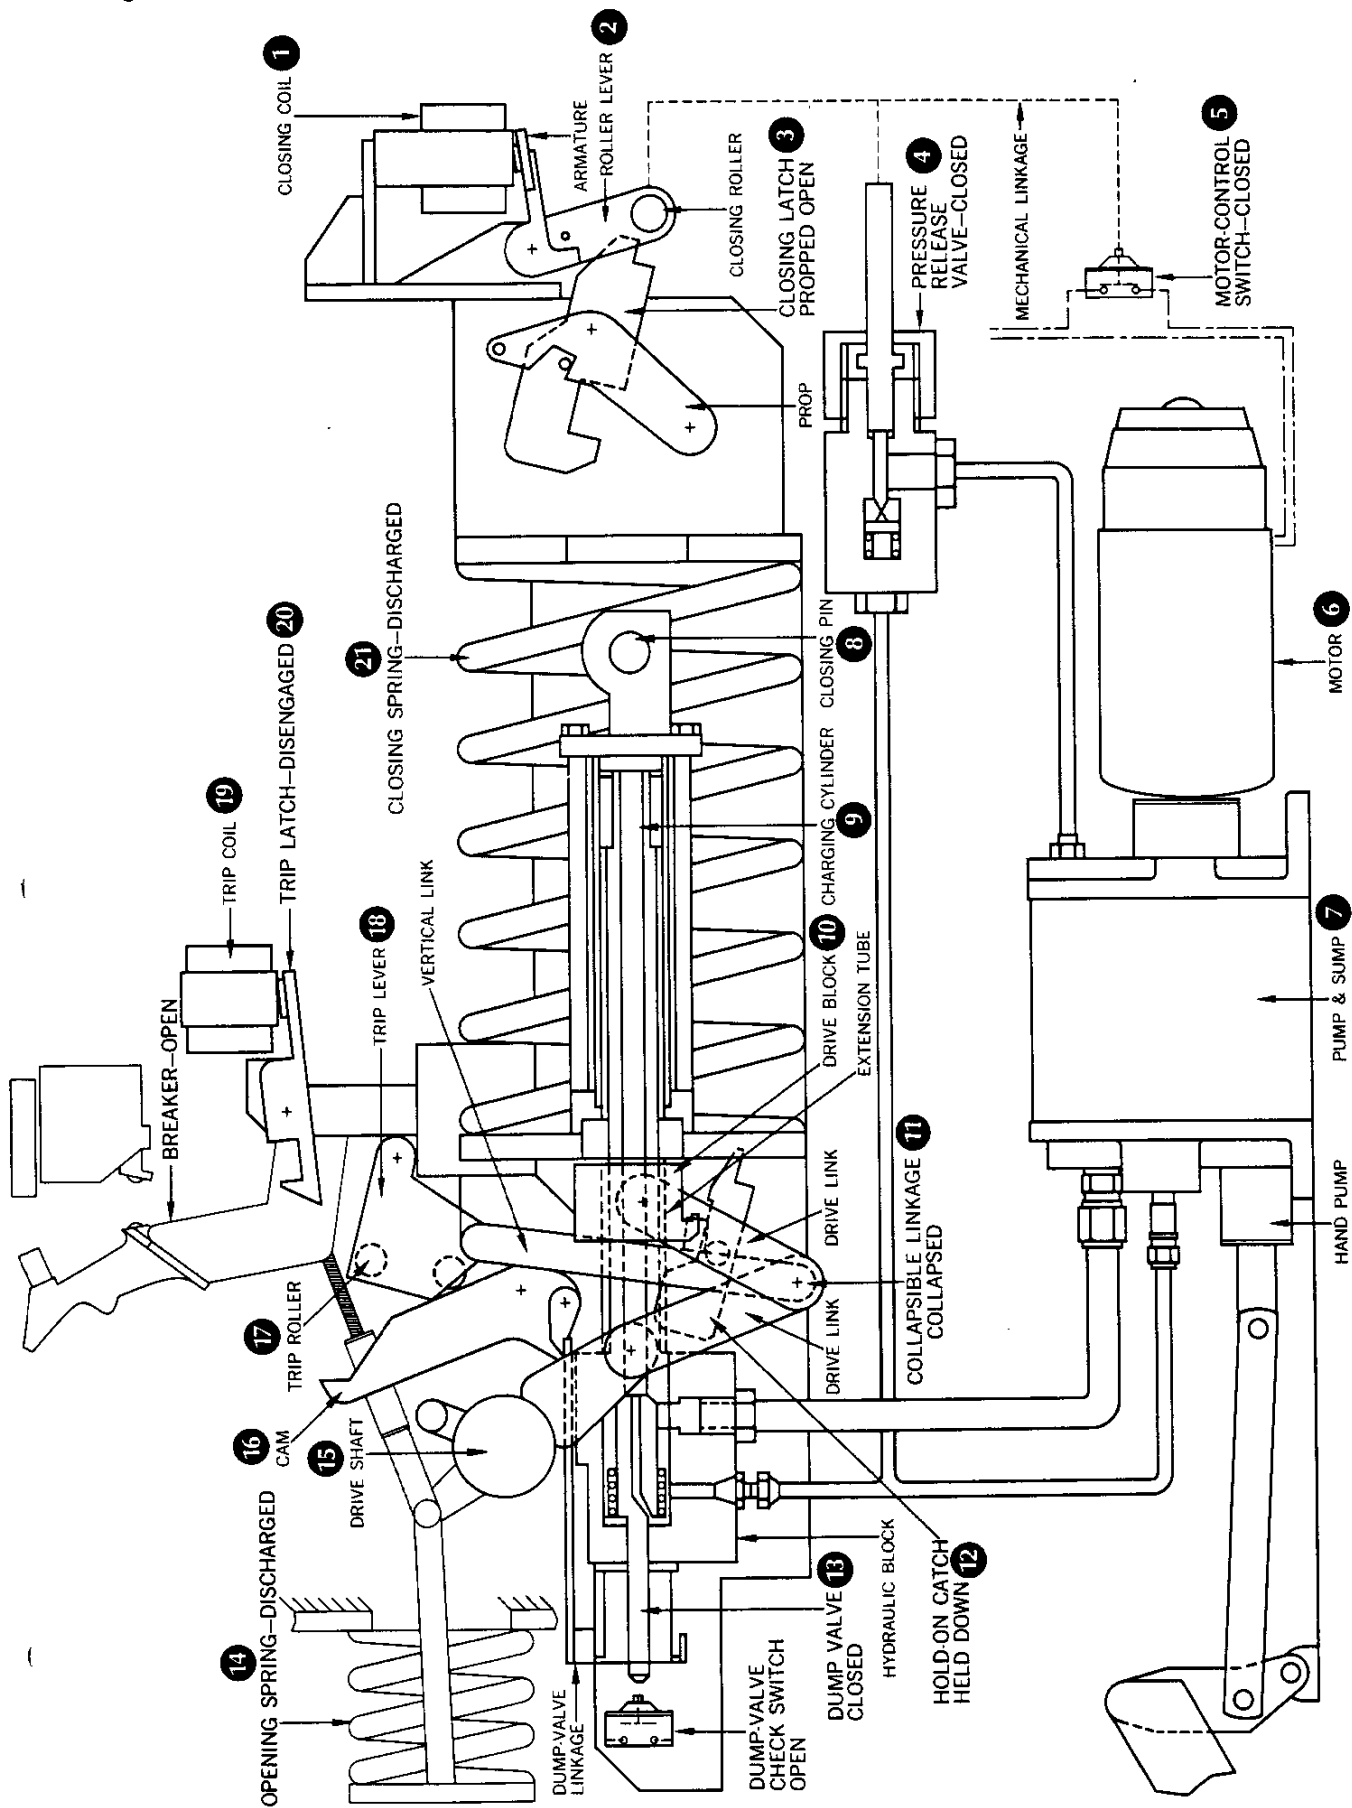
Type PSD operating mechanism: breaker open; closing spring discharged
